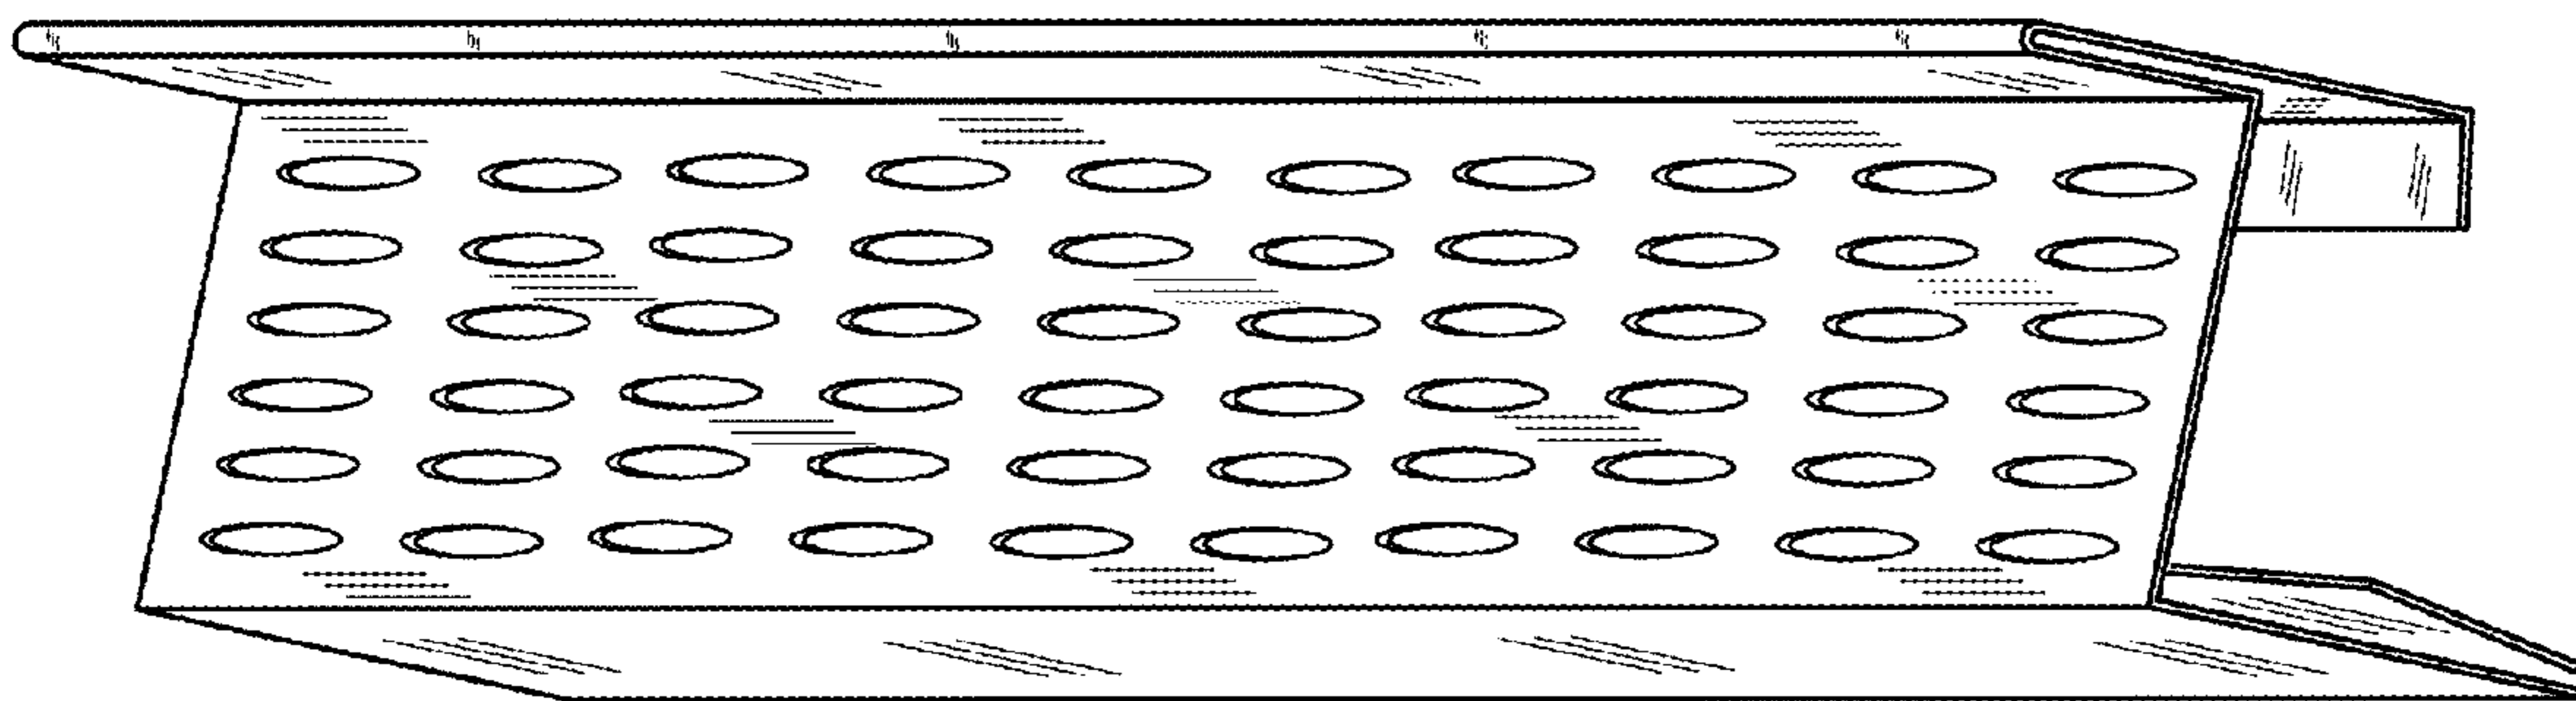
is a front perspective view of the Z-closure member with perpendicular flanges showing my new design having the front face substantially perpendicular to the top and bottom flanges;
